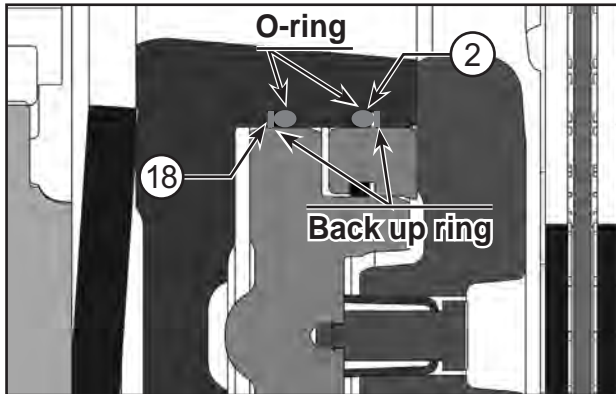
ATTENTION: The o-rings always have to be assembled from the pressure facing side.
